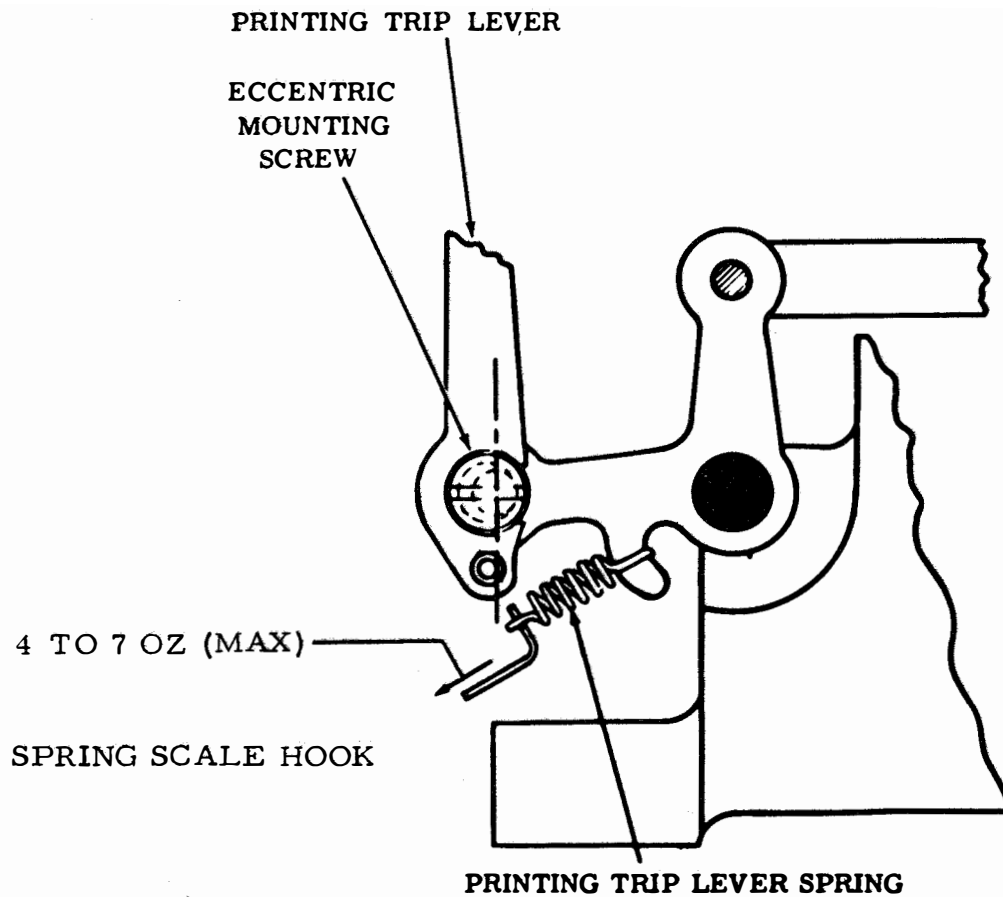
Print Hammer Trip Lever Spring, Front View
